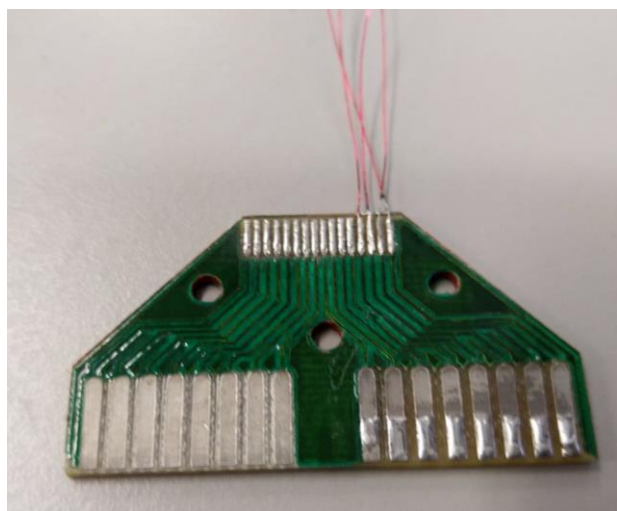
Final product of the PCB with copper wires soldered for testing
